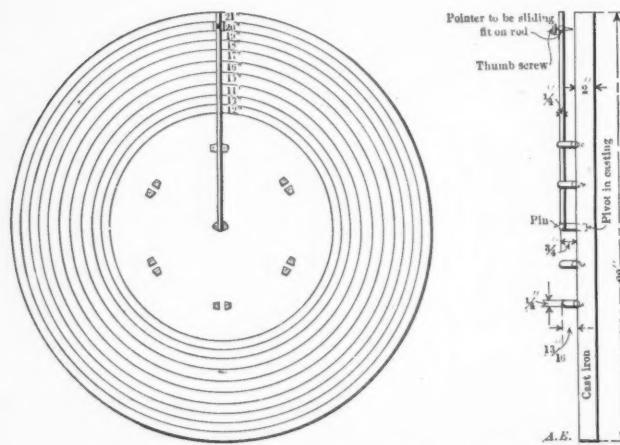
PLATE FOR LAYING OUT DUNBAR PACKING RINGS.
